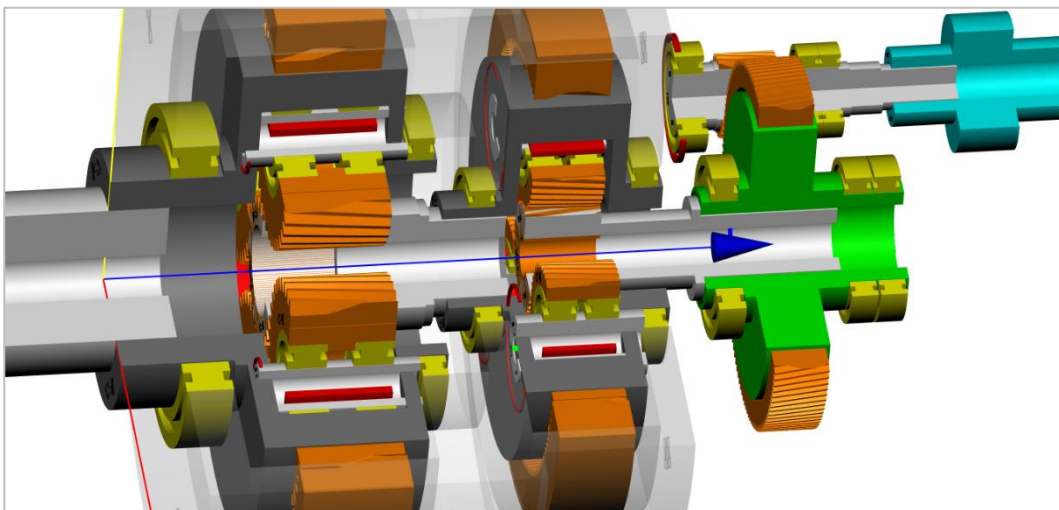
Typical wind turbine main gearbox, bearings in yellow.
